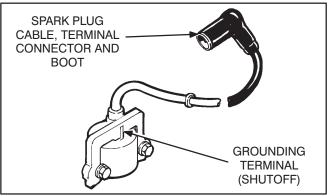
MAGNETO COIL ASSEMBLY
